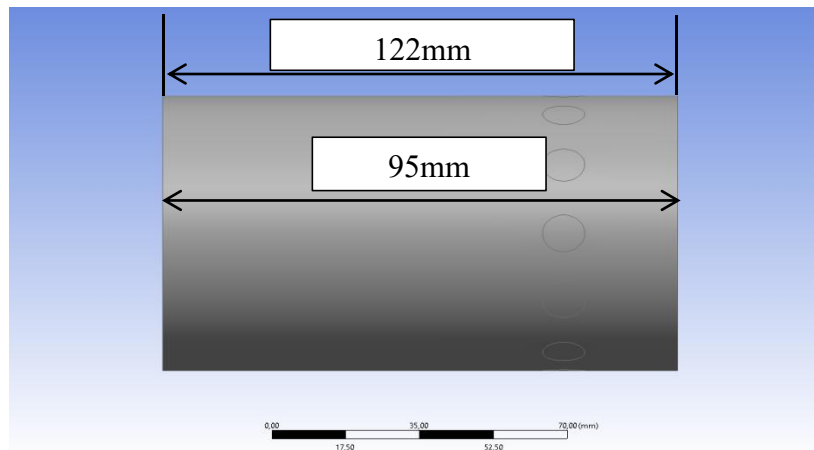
reverse air combustor cylinder front face-dimensions.
